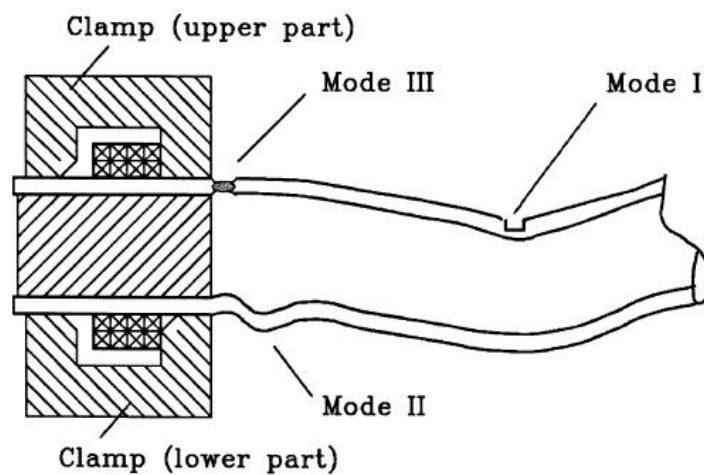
Failure modes exhibited by pipe specimens [Chen & Shen (1998)].
